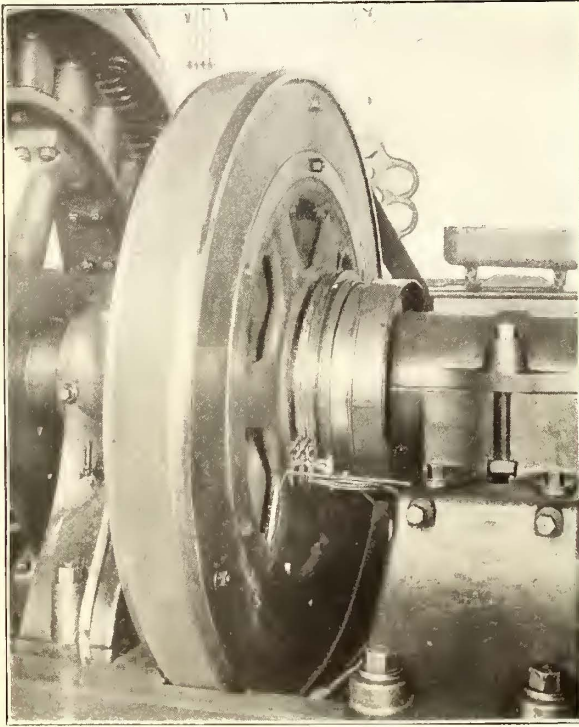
ONE OF THE MAGNETIC CLUTCHES, SHOWING COLLECTOR RINGS AND BRUSHES
